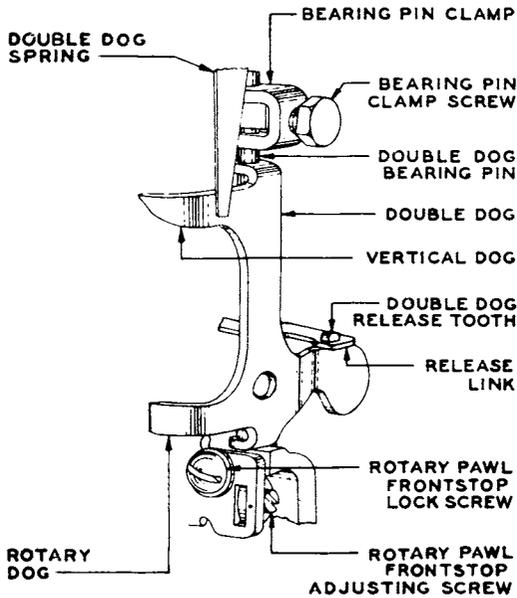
DOUBLE DOG AND ASSOCIATED PARTS
